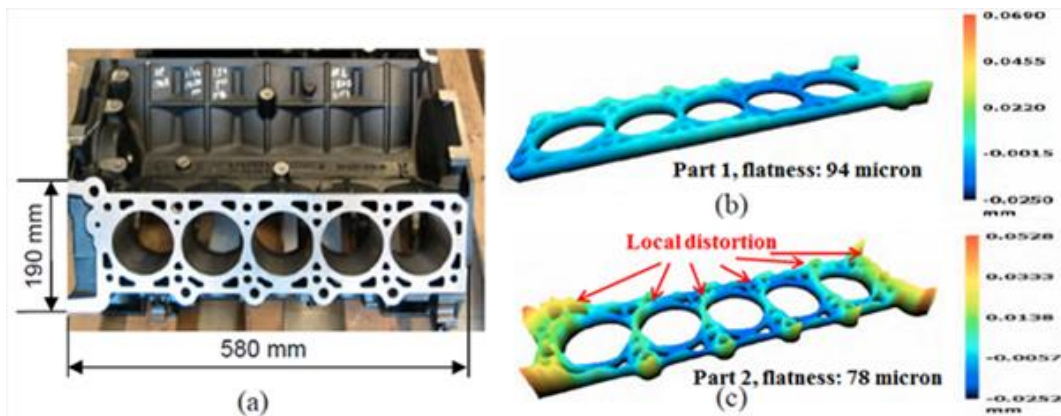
V10 engine block surface measurement: (a) overview, (b) new cutting tool and (c) after 1800 milling cycles
